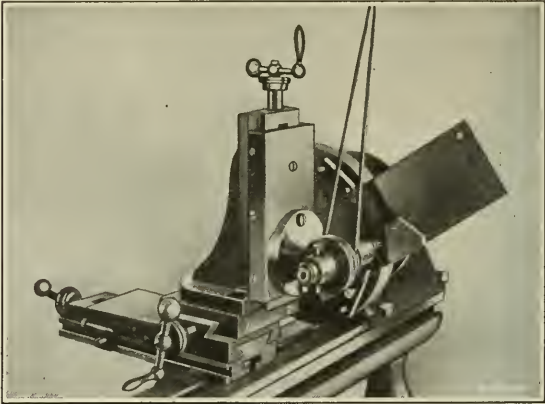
Milling Edges of Gage and Slots on Master Plate
